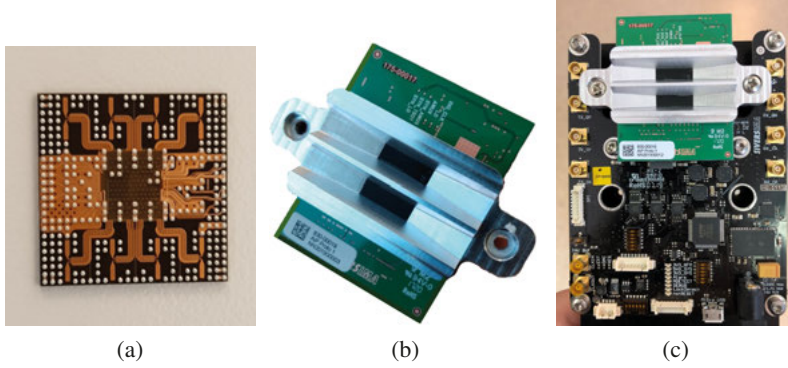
The 28 GHz antenna in package (a) Full bottom view of the package ( $12.6 \times 12.6 \text{ mm}^2$ ) is shown where antenna arrays can be seen on RDL1, (b) radio frequency module: the package is integrated with the FR-4 PCB with aluminium heatsink placed on top, (c) evaluation kit: radio frequency module is attached on evaluation kit for characterization.
